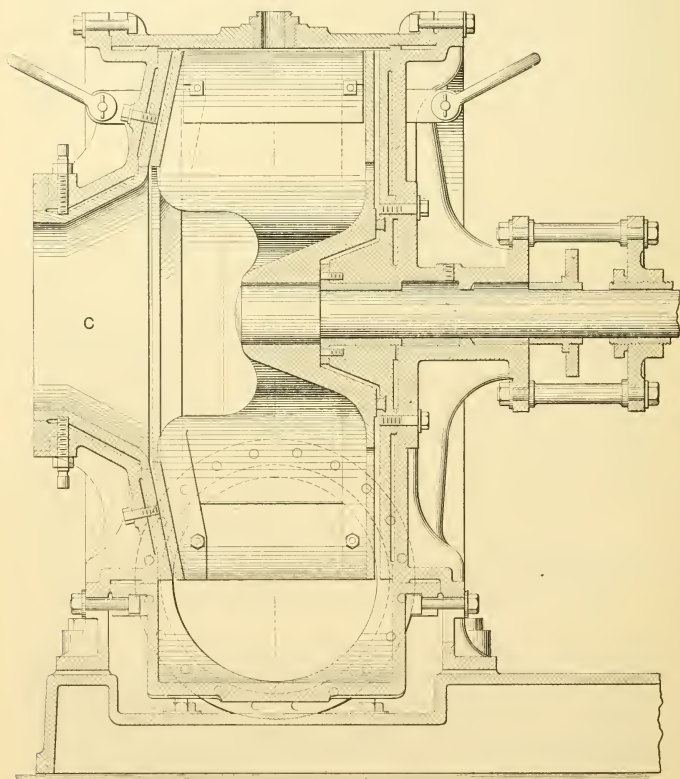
SECTIONAL VIEW OF CENTRIFUGAL PUMP FOR DREDGING
